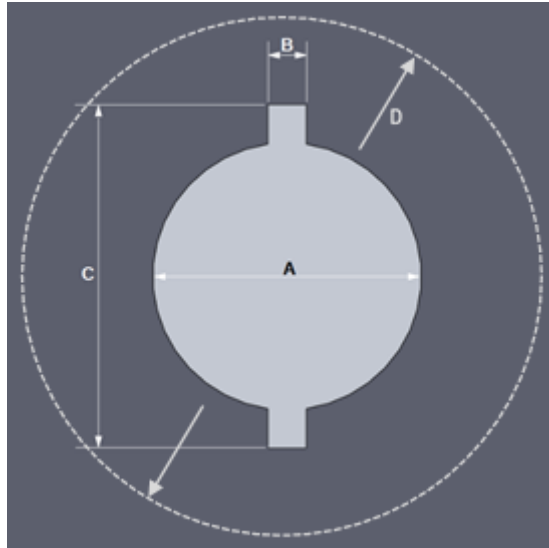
Panel cut-out dimensions for Jaeger Hermetic connector series: attachment by locknuts.
